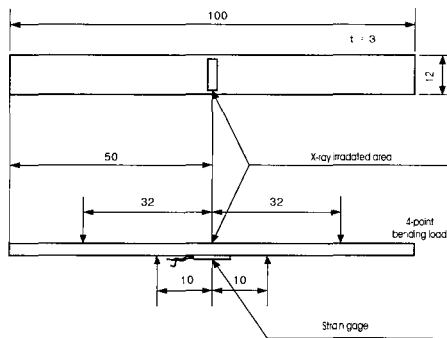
Geometry and dimensions of specimen for X-ray stress constant (unit : mm)
